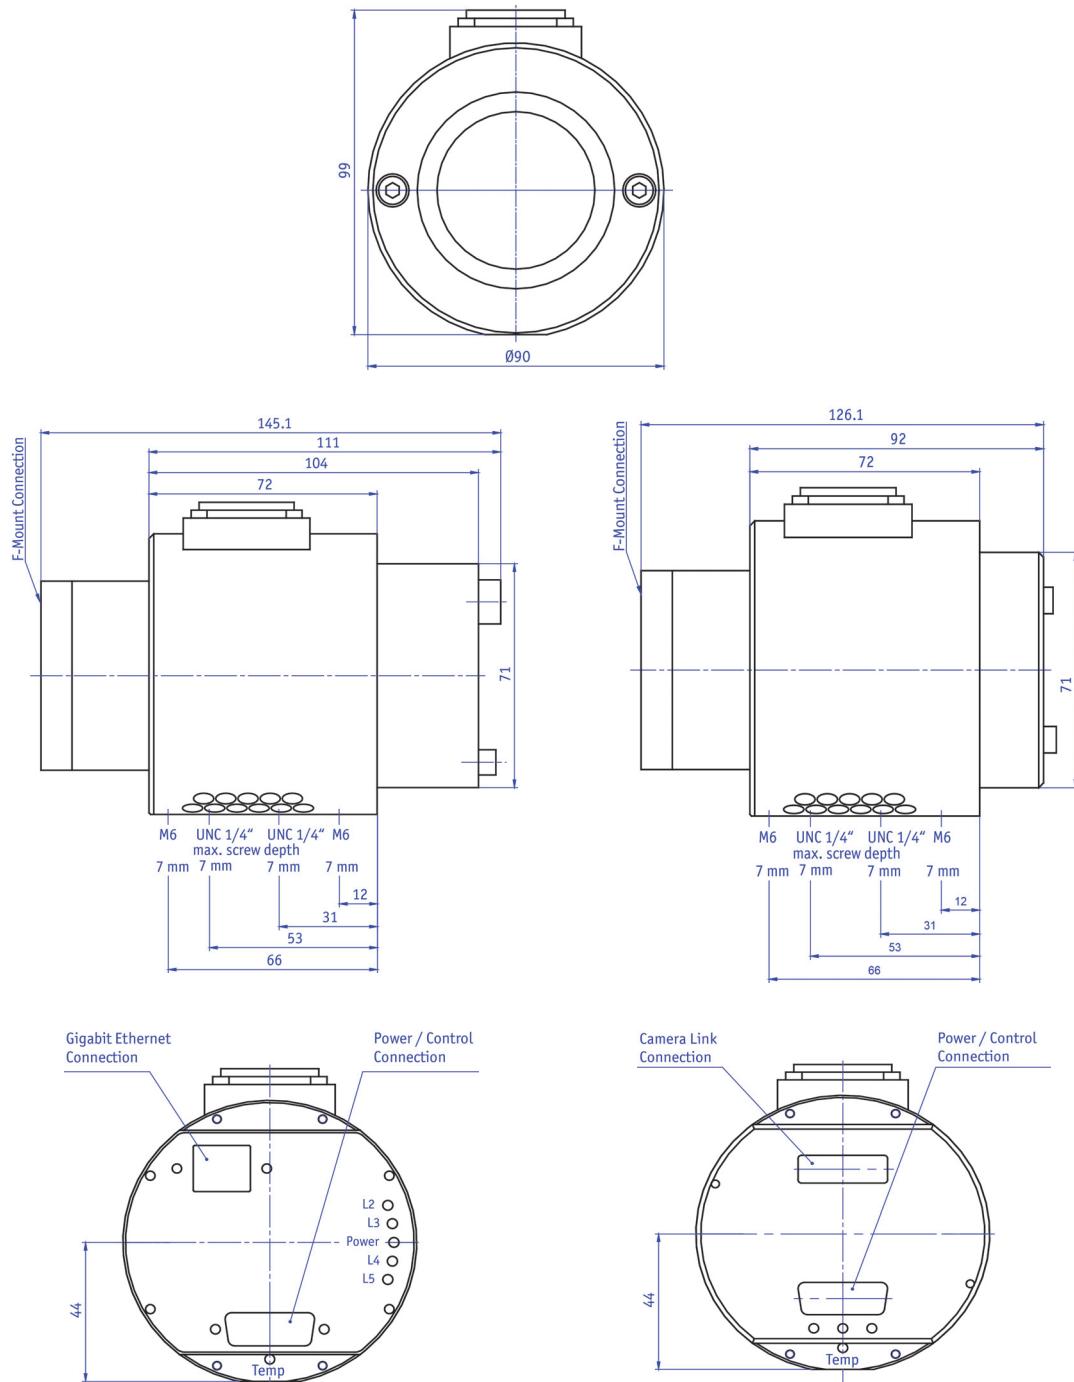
Camera dimensions: Goldeye P-032 SWIR F-Mount Cool / Goldeye CL-032 SWIR F-Mount Cool
